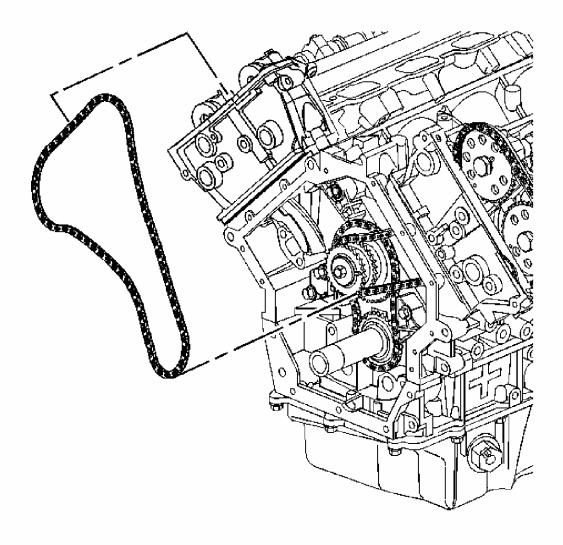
View of Right Secondary Camshaft Drive Chain Courtesy of GENERAL MOTORS CORP.
